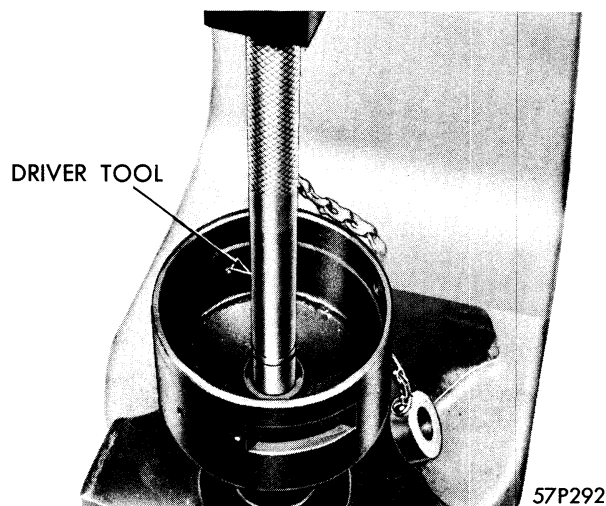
Removing Drive Shaft Bushing with Tool C-3041
